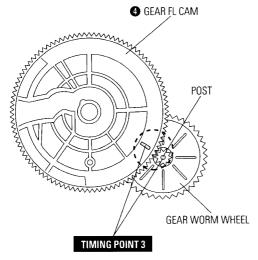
Assembly of Gear FL Cam, Gear Joint 1, 2
